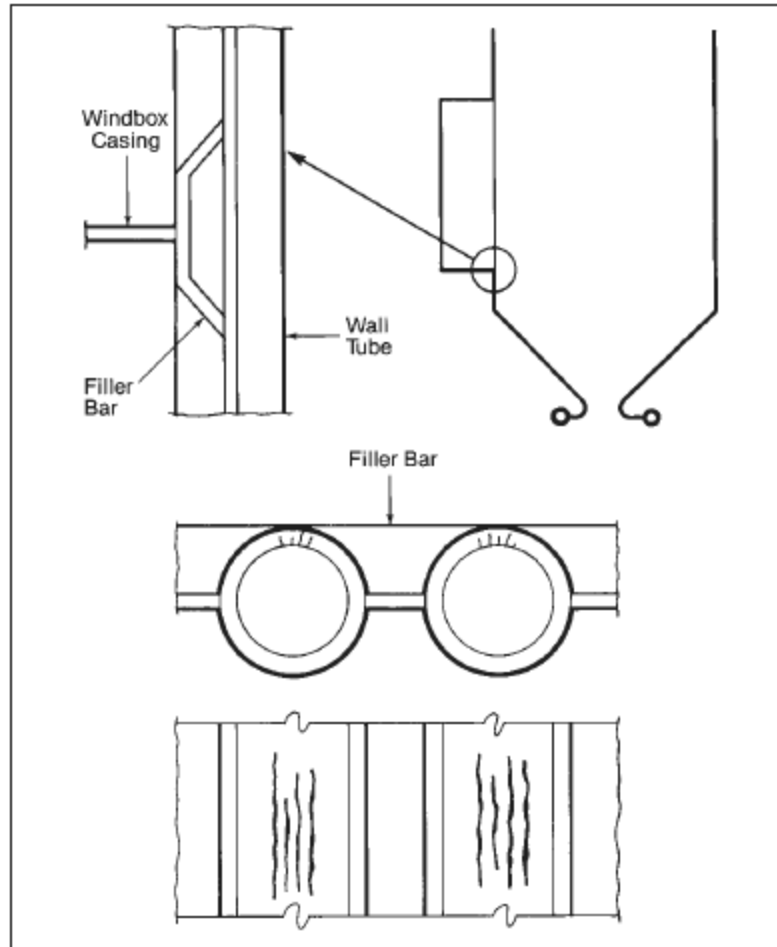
Longitudinal cracking in furnace wall tubing. Source: (Babcock & Wilcox, 2005, ss. 45-18)
